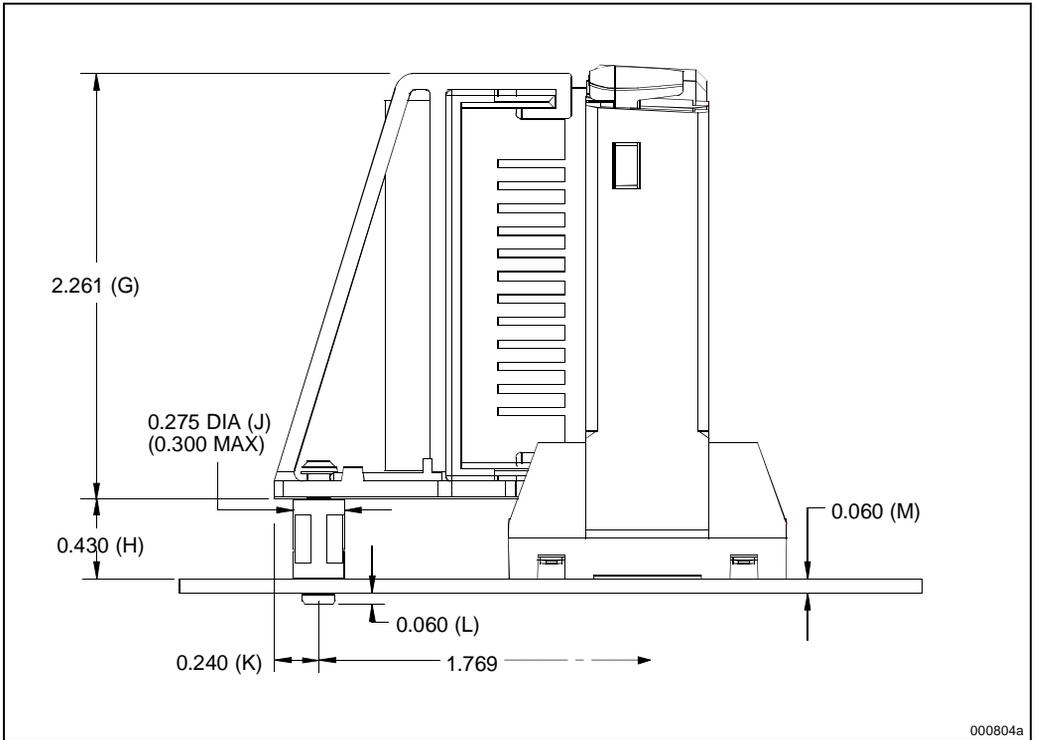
Side View Space Requirements for Boxed Processor Fan/Heatsink Supports
